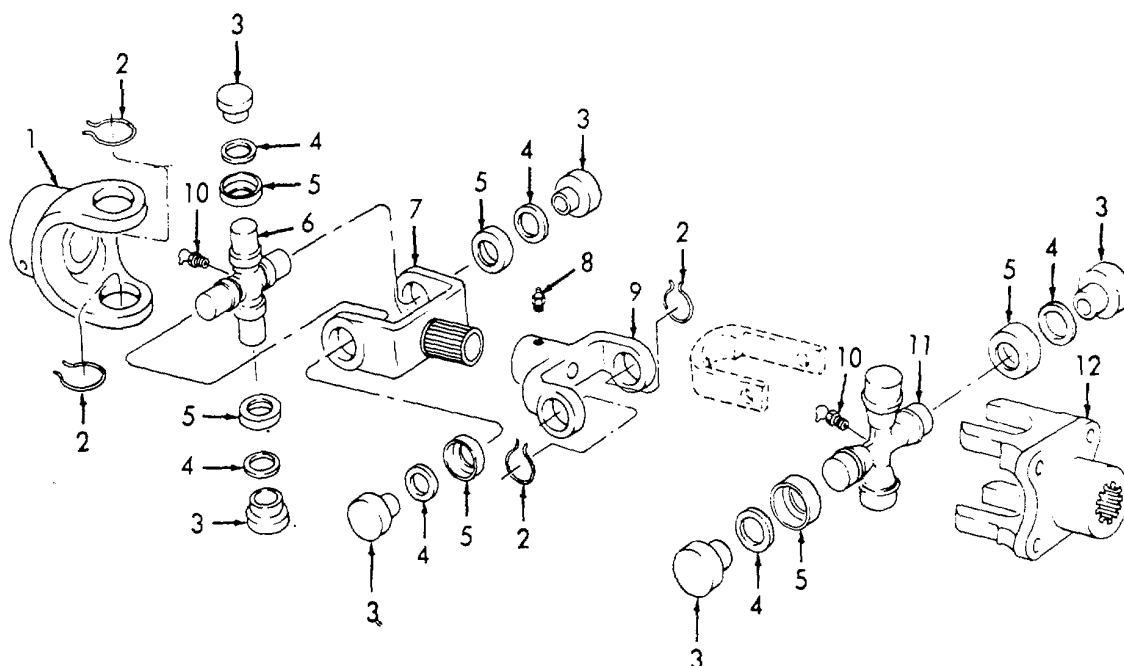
Power takeoff universal joint and shaft assembly, removal and installation.
